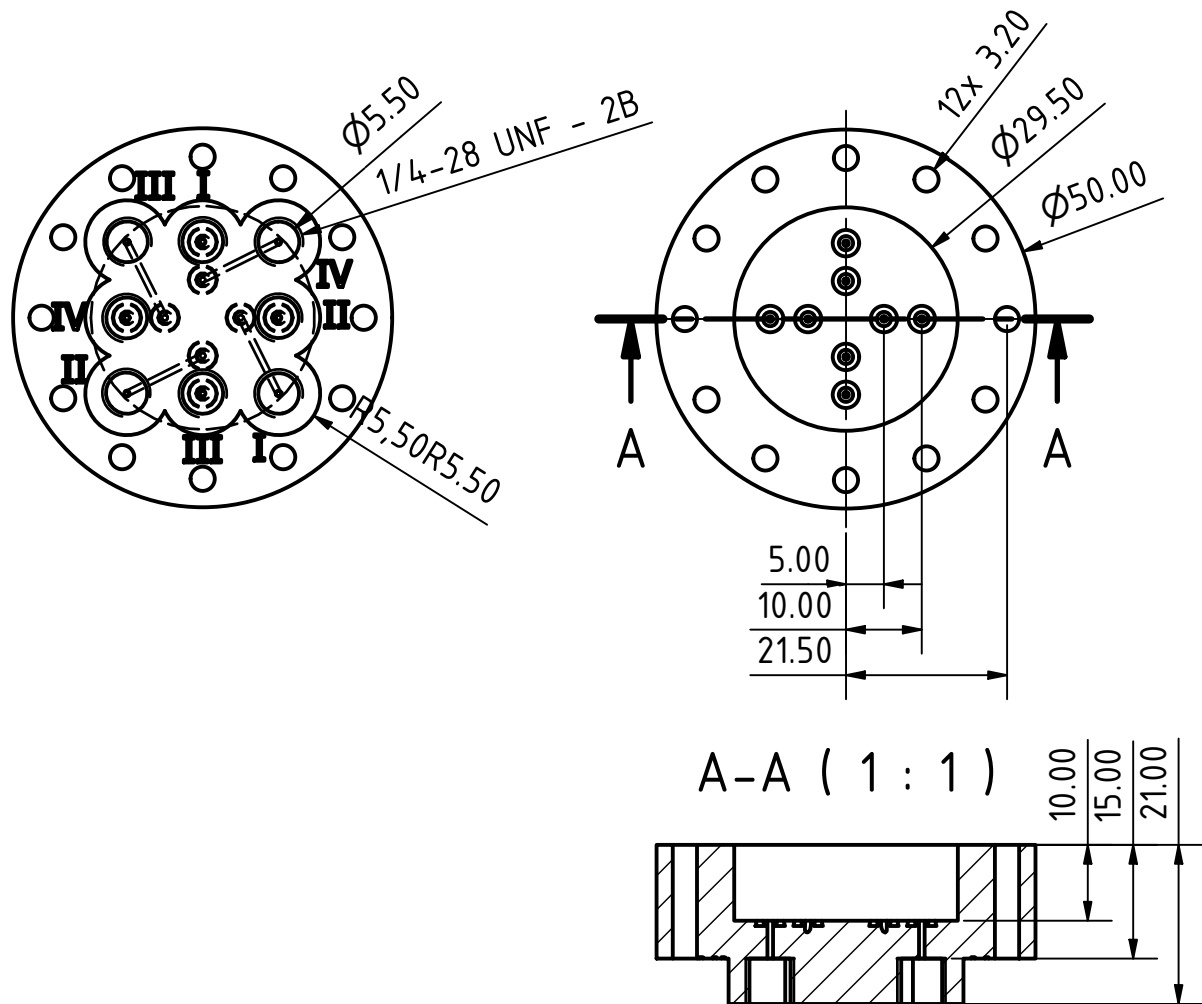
Technical drawing of the stator of the integrated CMCC system: top view (top left), bottom view (top right), and section view (bottom) with scale 1:1. All threads were cut after printing, all dimensions in mm.
